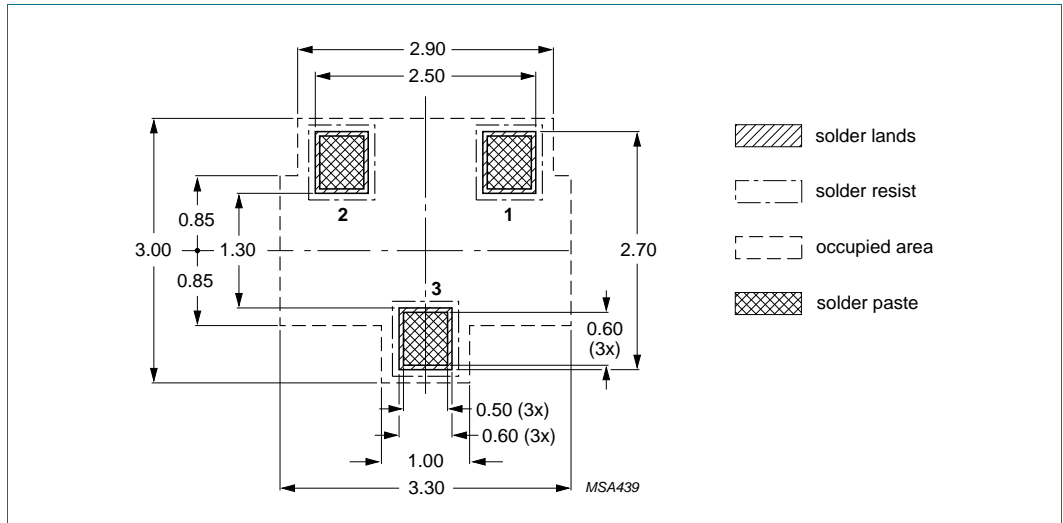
Reflow soldering footprint SOT23 (TO-236AB)
